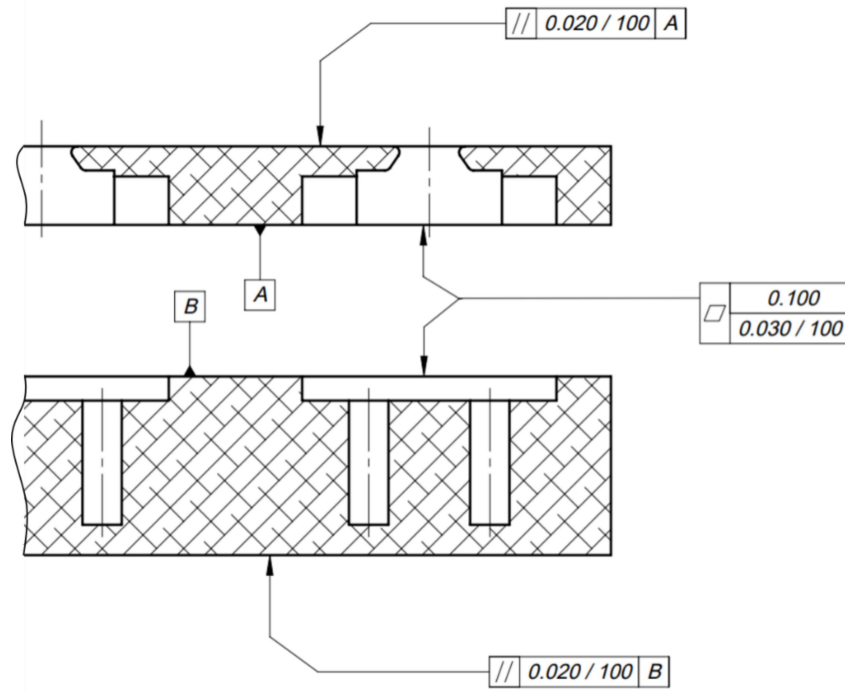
Top and Bottom Component's Mating Surfaces' Geometric Tolerancing
